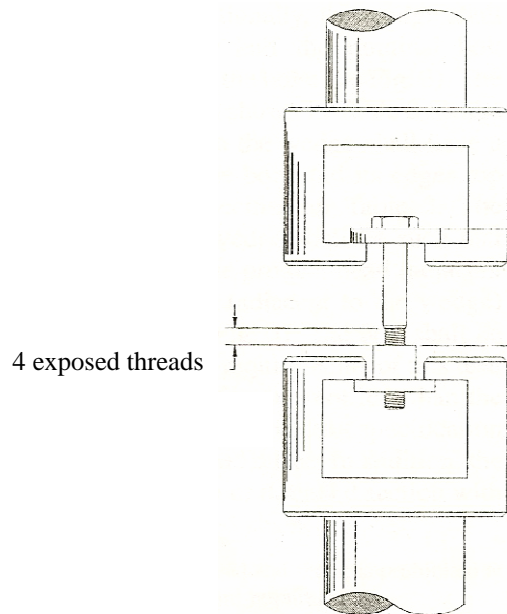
Tension Testing of Full-Size Structural Bolts (ASTM F606-05)
